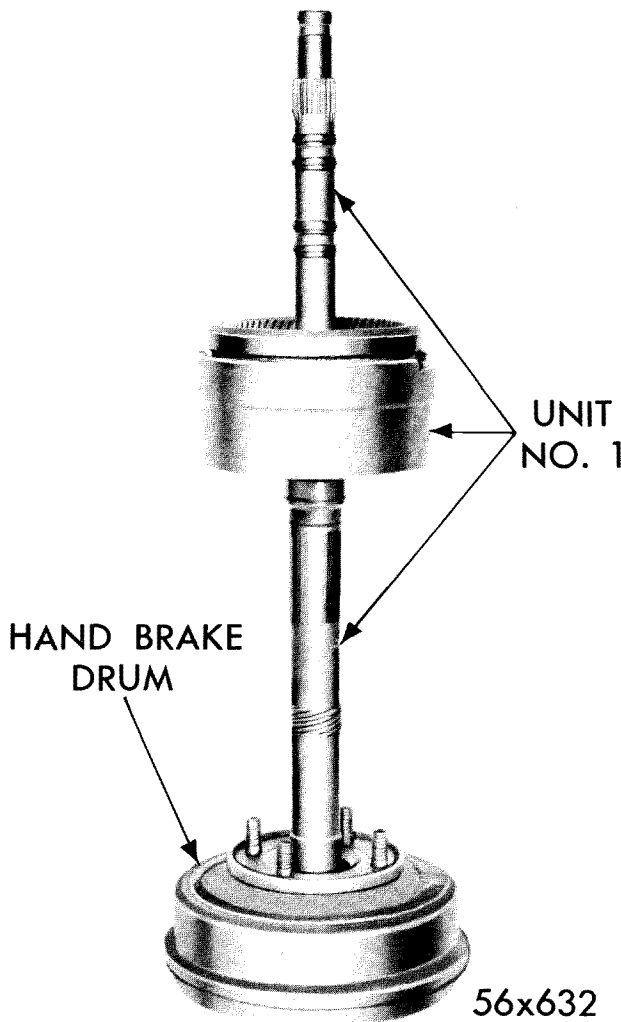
Using Propeller Shaft Flange and Brake Drum Assembly As a Holding Fixture for Unit No. 1
